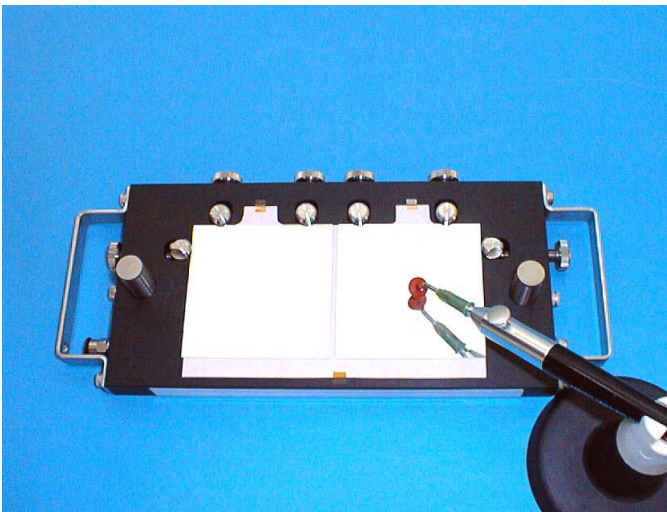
Placing the detectors on the detector pre-alignment fixture. A vacuum picker can be used in holding detectors.
